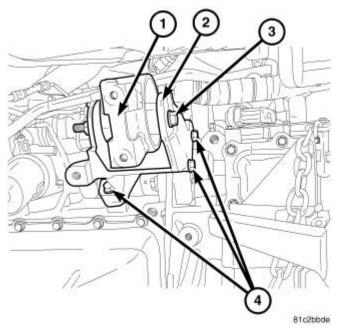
Identifying Front Engine Mount Courtesy of CHRYSLER LLC
